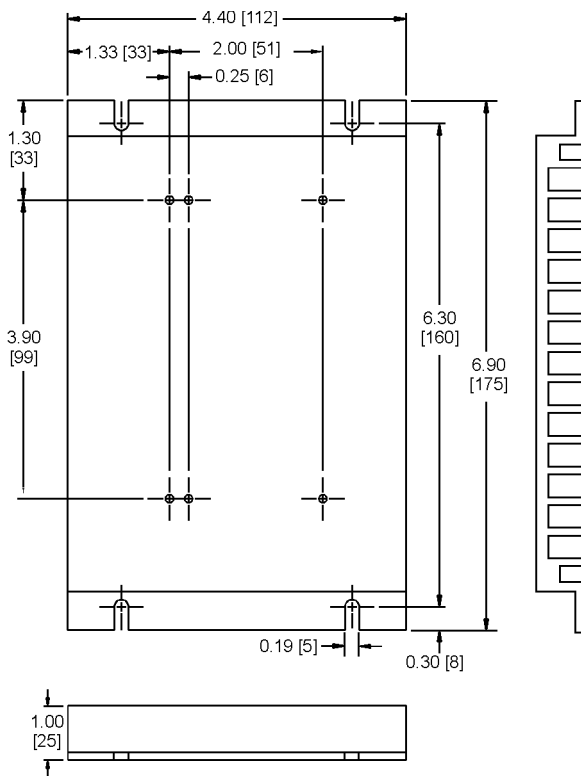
MMVFDxx-115AC and MMVFDxx-230AC Dimensions
